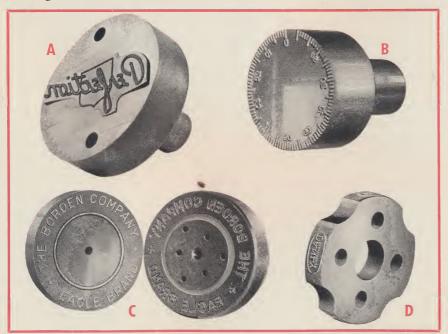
Marking dies. A: press die for a curved surface; B: press die for dials; C: press die for embossing cans; D: roll die for continuous marking.
